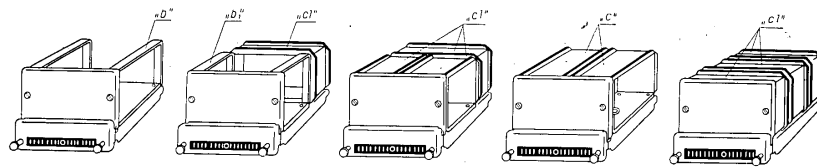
Various methods of mounting of units on the base-plate of drawer, type "B"
